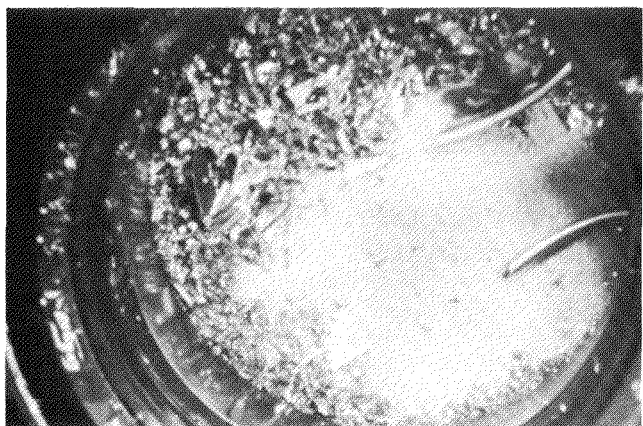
Drilling chips and ID tube cutting fines from two fuel assemblies. Filter pad is 2 1/2" in diameter.
